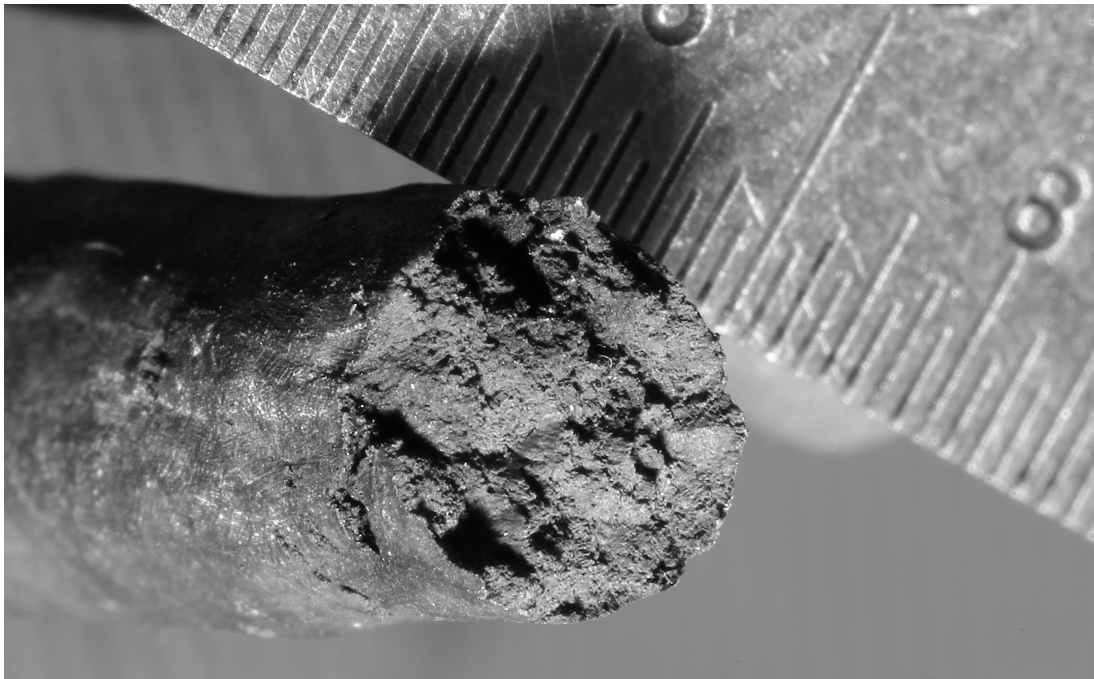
Macro-photographic image of the fracture surface of the specimen S1 halve demonstrated on the left-hand side in figure 22.
